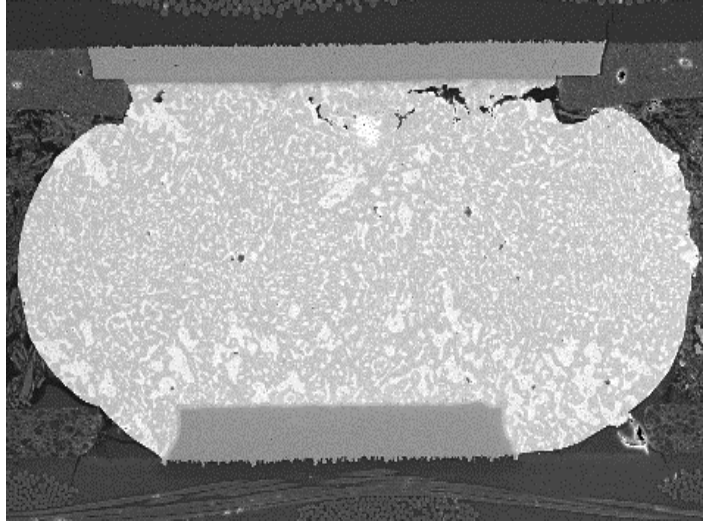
Simultaneous Crack Propagation Top Left and Right Corner of the Solder Joint, 27 mm BGA, Thermal Ball after 1000 Cycles
